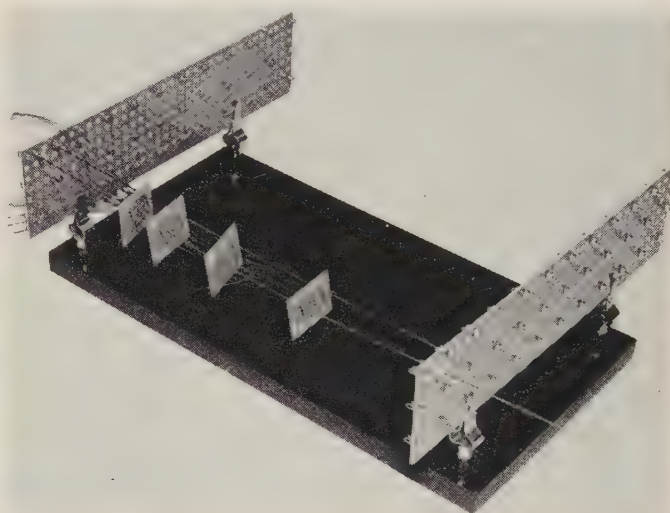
Four transfluxor platens mounted in wiring jig with wiring partially completed.
